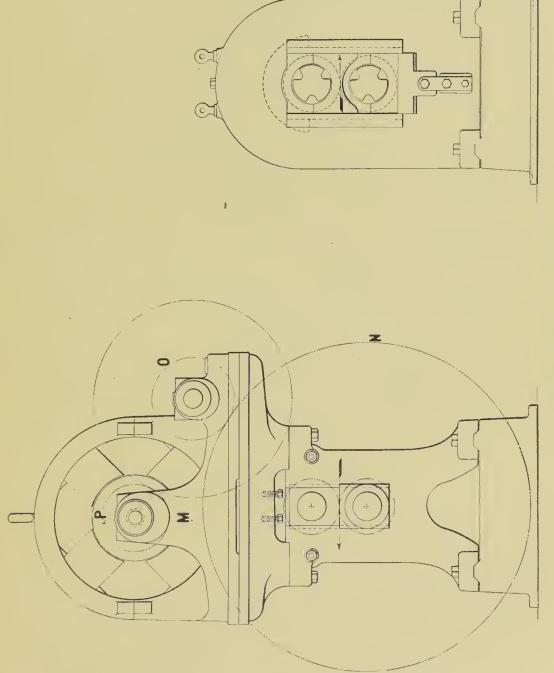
ROLLING MILL—SIDE VIEWS.
